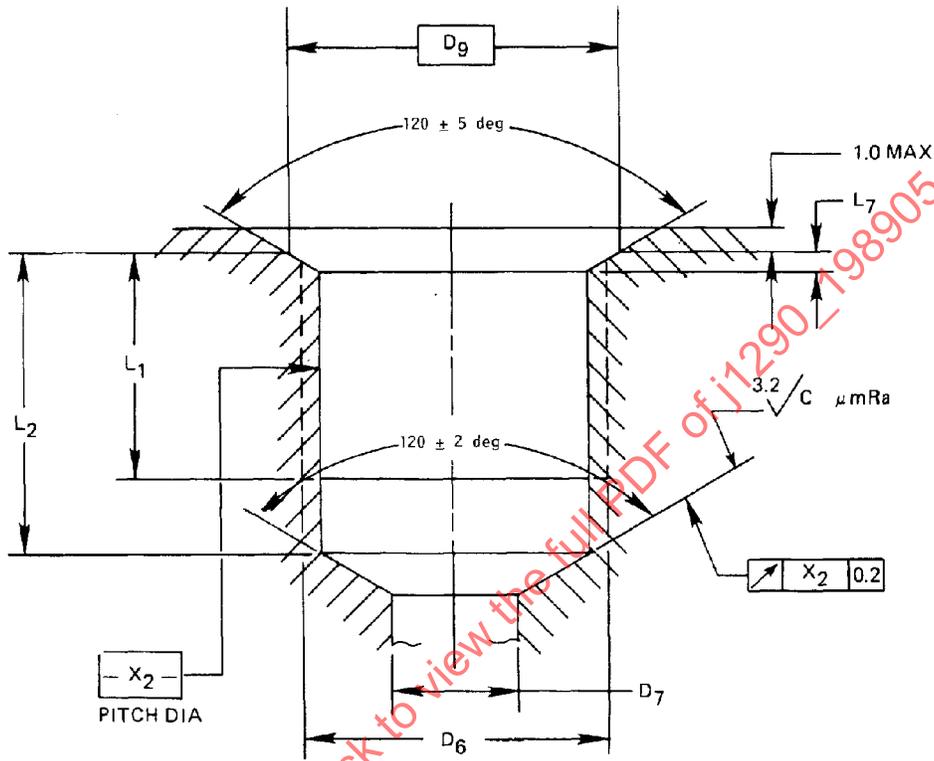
THREADED PORTS FOR TUBE NUTS (mm)
